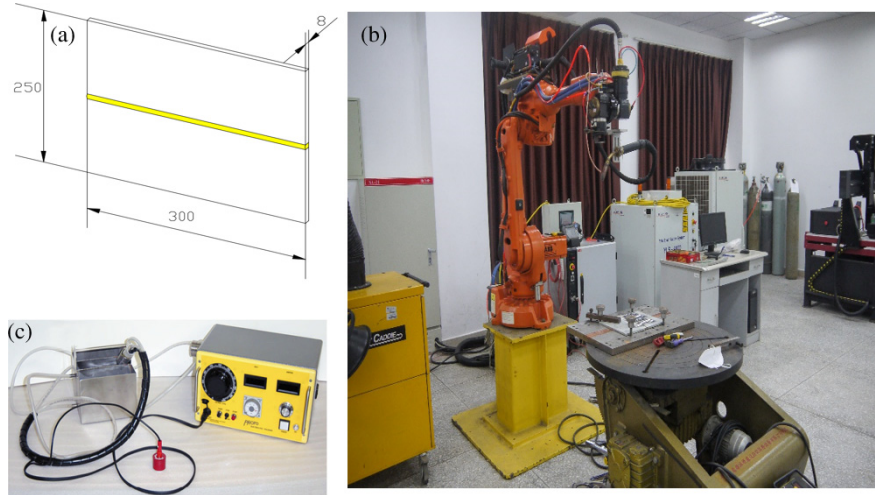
(Color online) Sample preparation stage: (a) Aluminum alloy test plate size. (b) KempArc-450 pulse welding machine. (c) 8818-V3 electrolytic polishing instrument.
